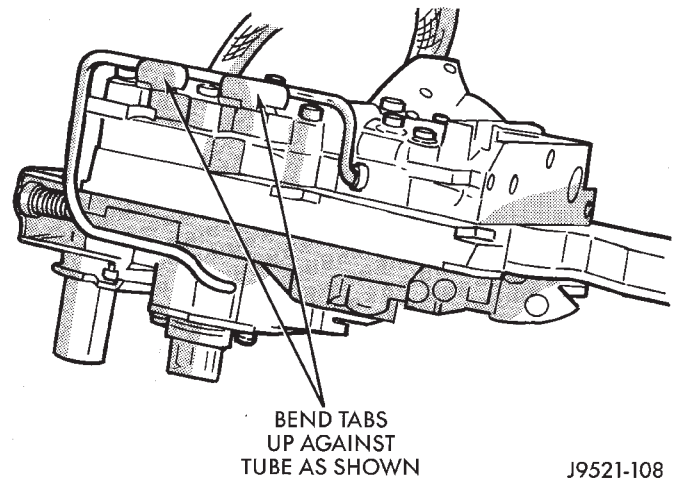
Securing Boost Valve Tube With Brace Tabs
